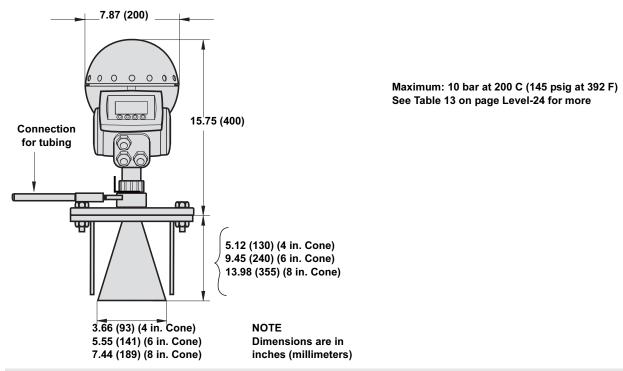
Extended Cone Dimensions for Stainless Steel Flange
